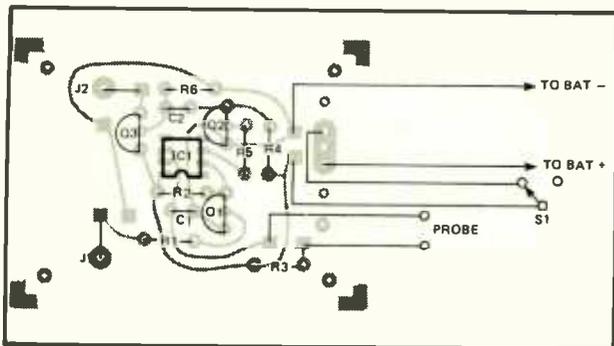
THE COMPONENT SIDE of the printed circuit board is also the panel for the BioBox. Parts placement and locations are shown here.
